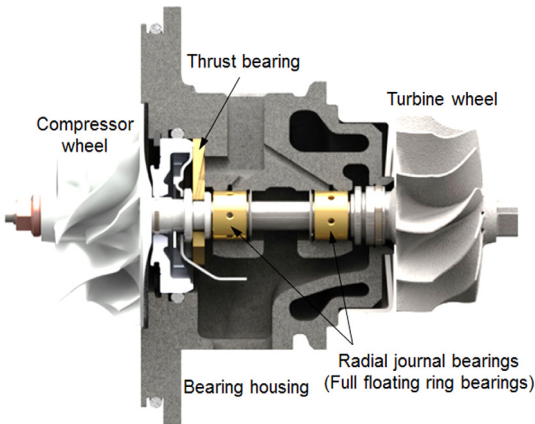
Layout of the center housing and rotor assembly in automotive turbocharger
